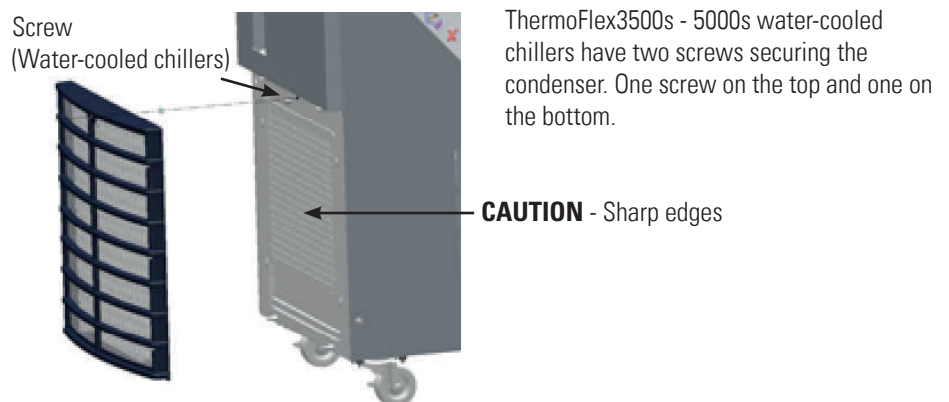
ThermoFlex900s - 5000s Condenser Grill Removal
